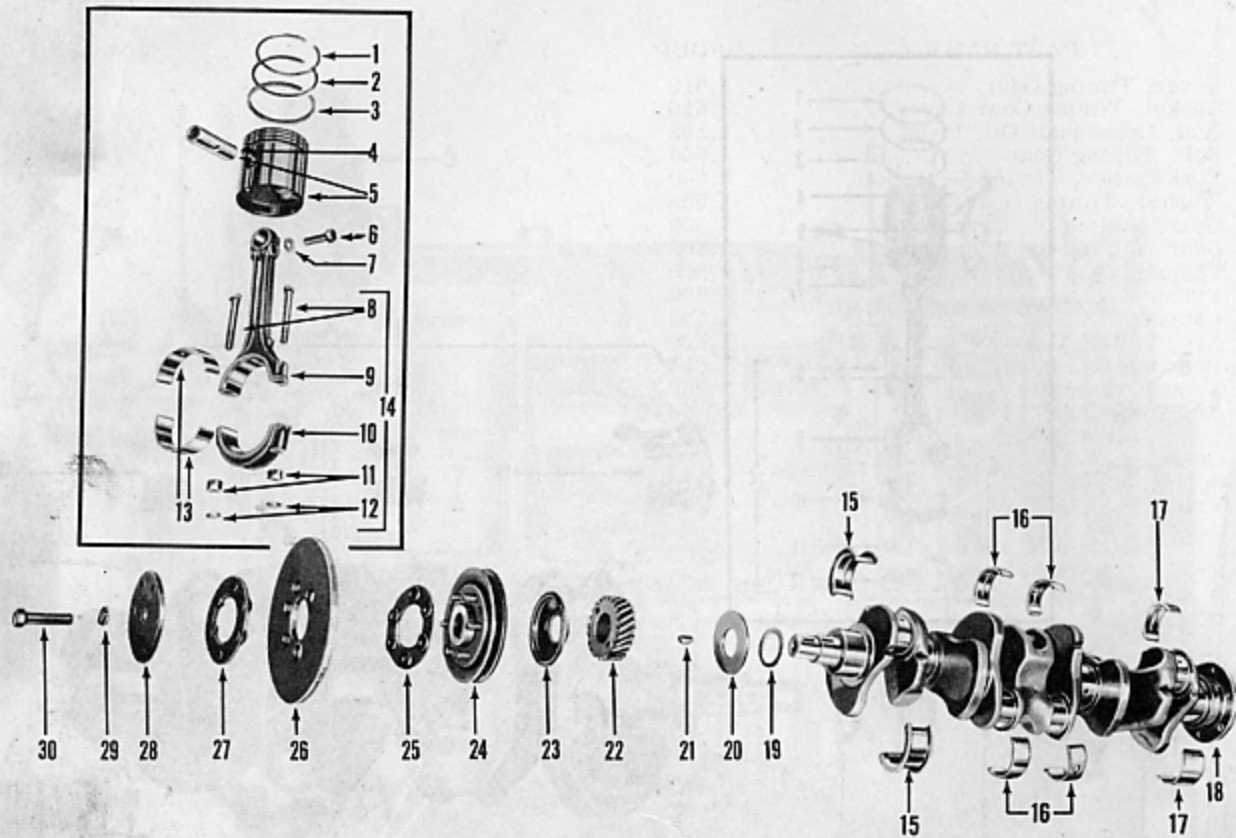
CRANKSHAFT—6 CYLINDER—EXPLODED VIEW
